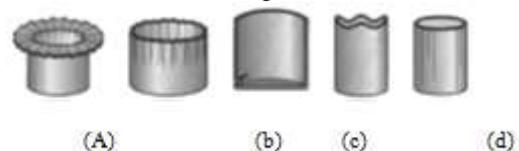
Various Defects In Deep Drawing Process. [1]
